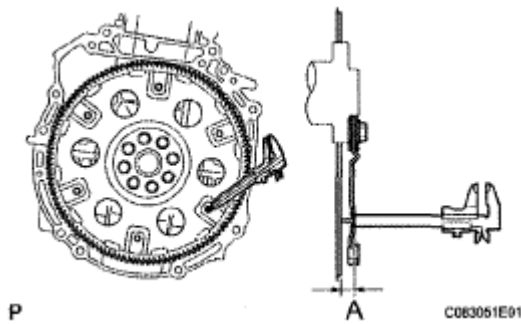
Measuring Dimension "A" Between Transaxle Fitting Part Of Engine
